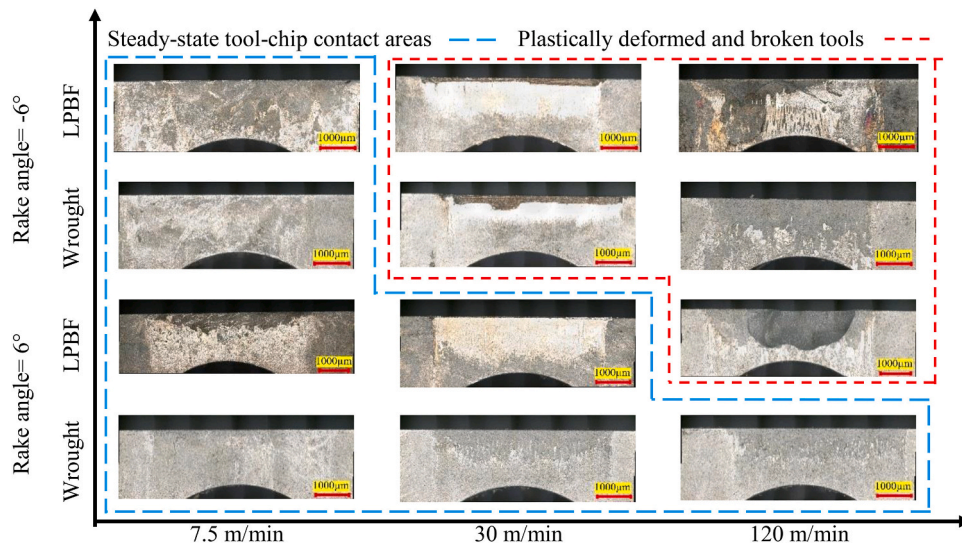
Cutting tool rake surface images used in the cutting experiments of PBF-LB and wrought discs.
